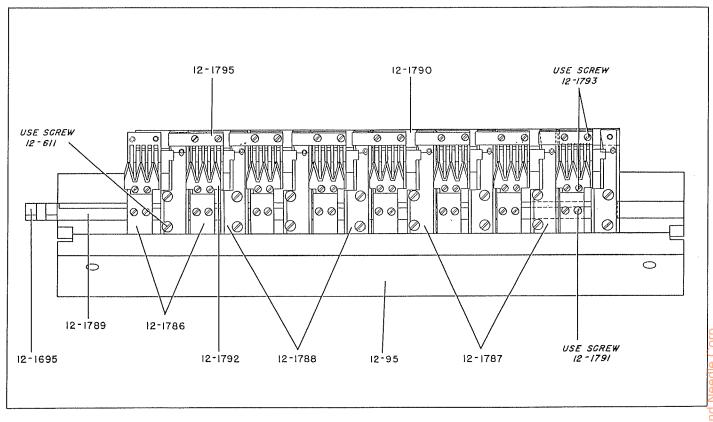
Automatic Cut-Off Presser Plate Bar Assembly (Parts)
